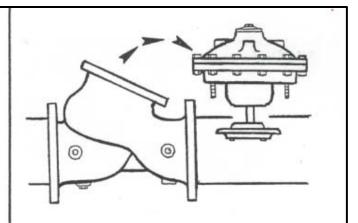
The actuator lifts out in one complete assembly. Inspect the seat and seal.
